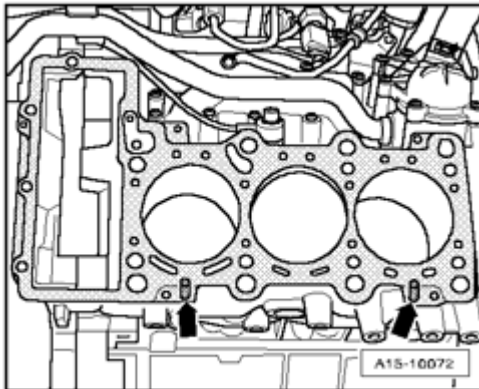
Paying Close Attention To Centering Pins In Cylinder Block
